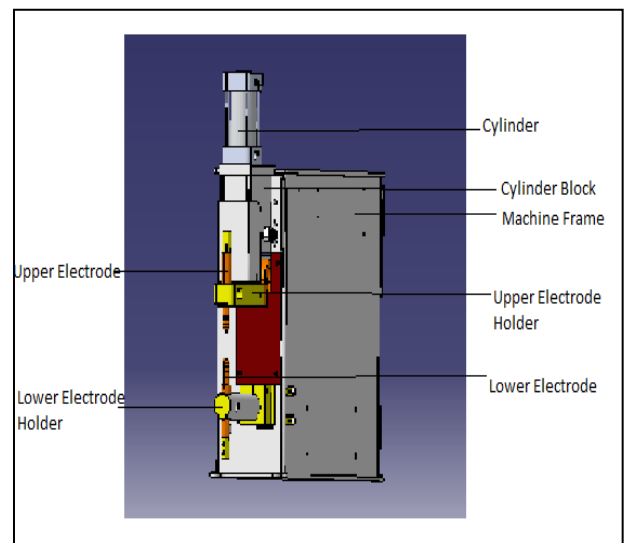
35KVA Table Top Spot Welding Machine
